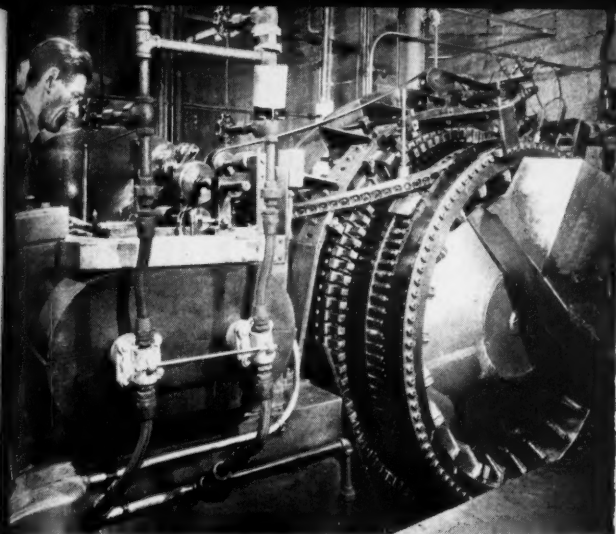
Close-up of Ohio Rubber's continuous automatic rubber molding machine
